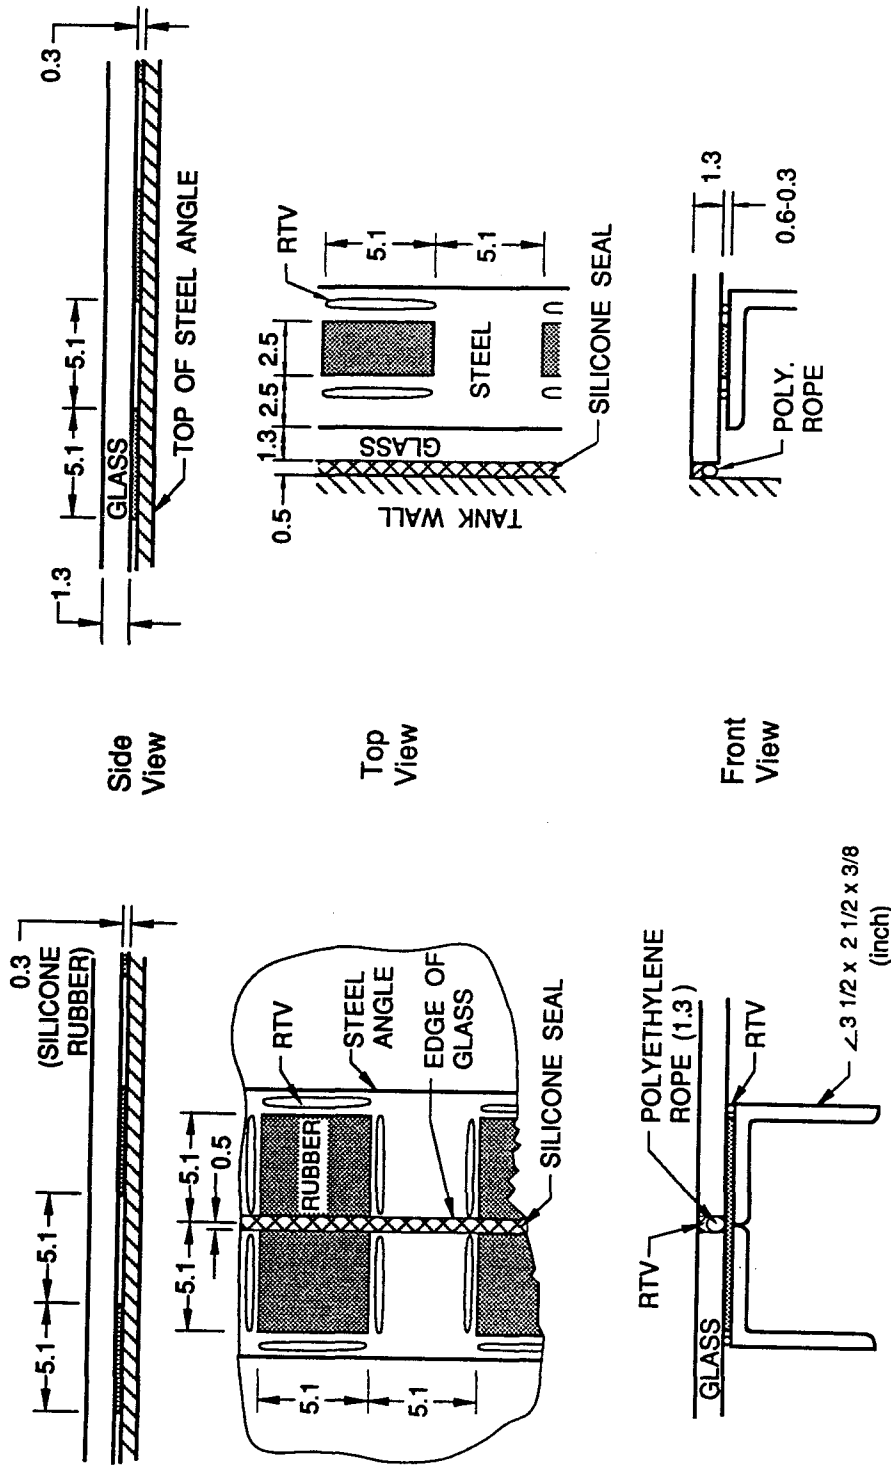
Drawing of a Typical False Bottom Panel.
